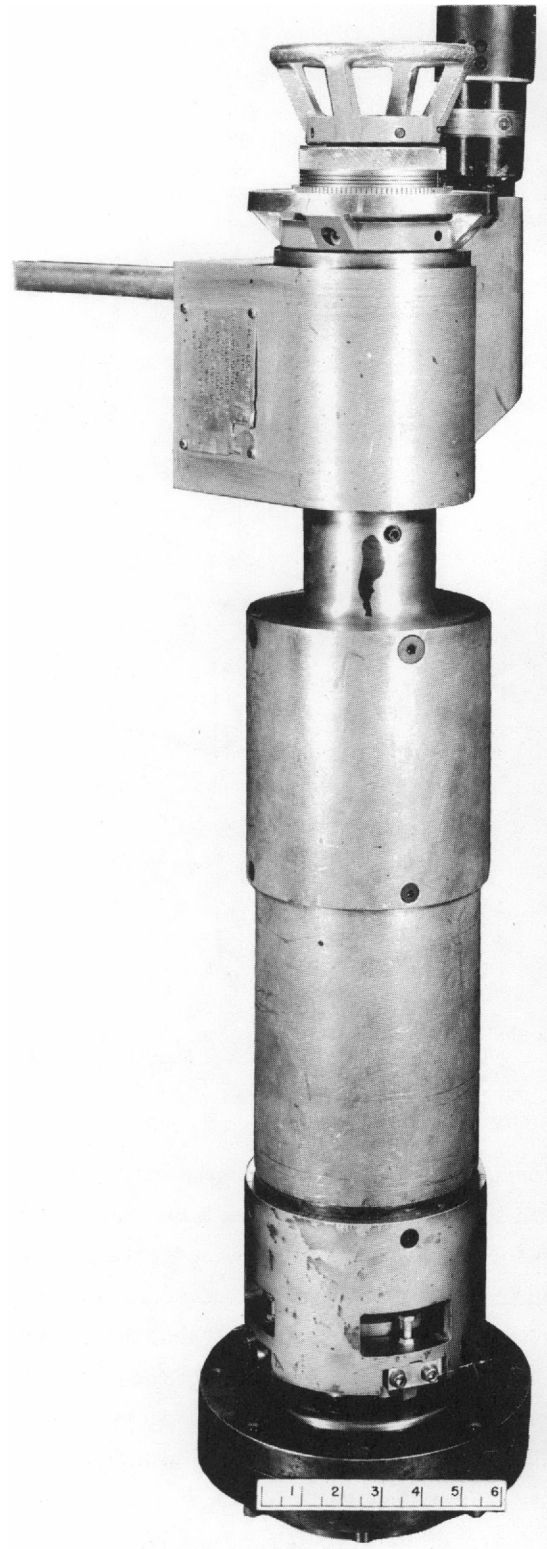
Cutting Control Rod Mechanism Port Weld.
